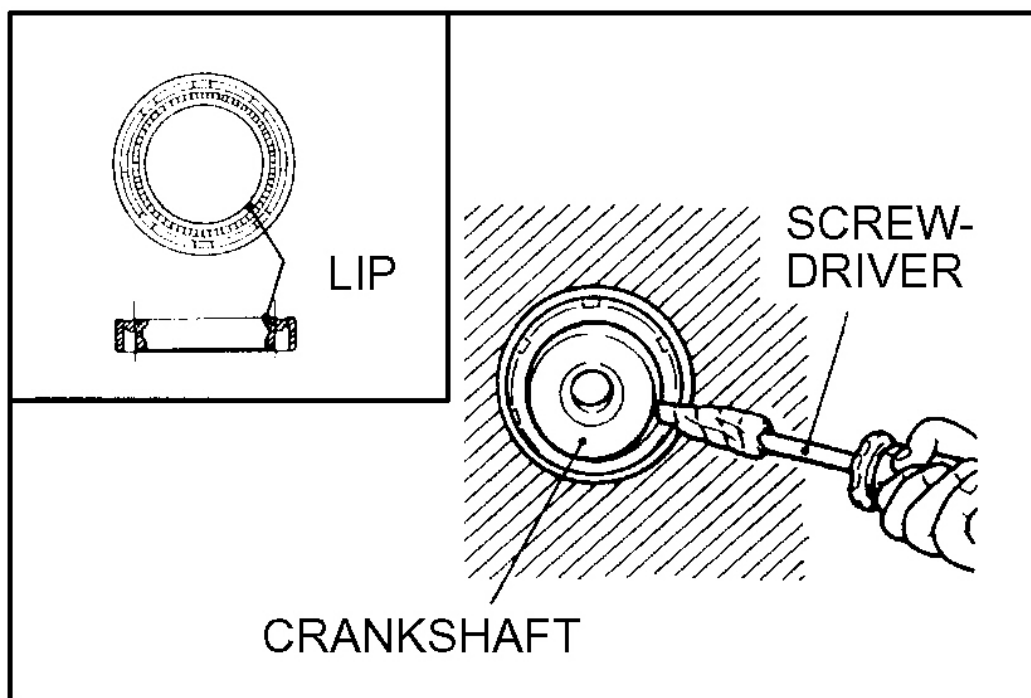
Removing/Installing Front Crankshaft Oil Seals
